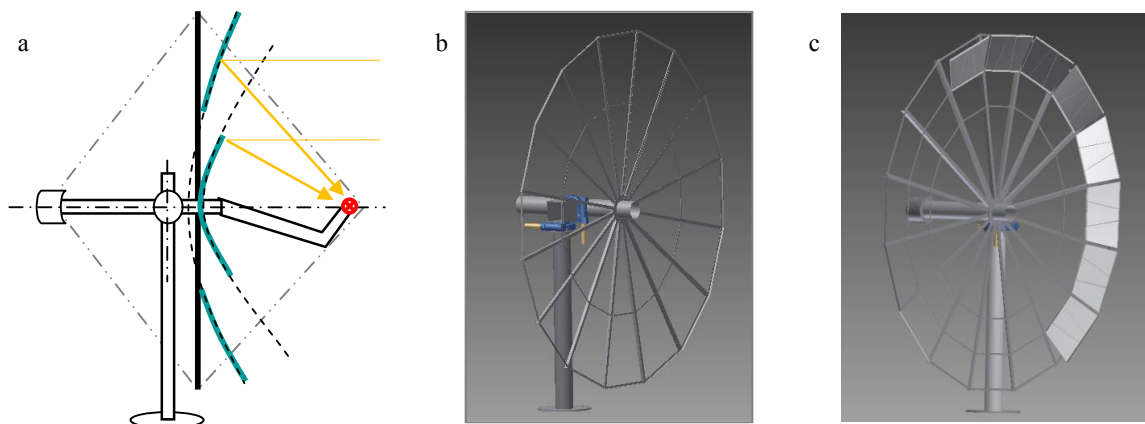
CAD pictures of proposed concentrator, comprising flat structural frame fitted with parabolic reflector array rings, pivotally supported on pedestal through balancing-boom arm.
